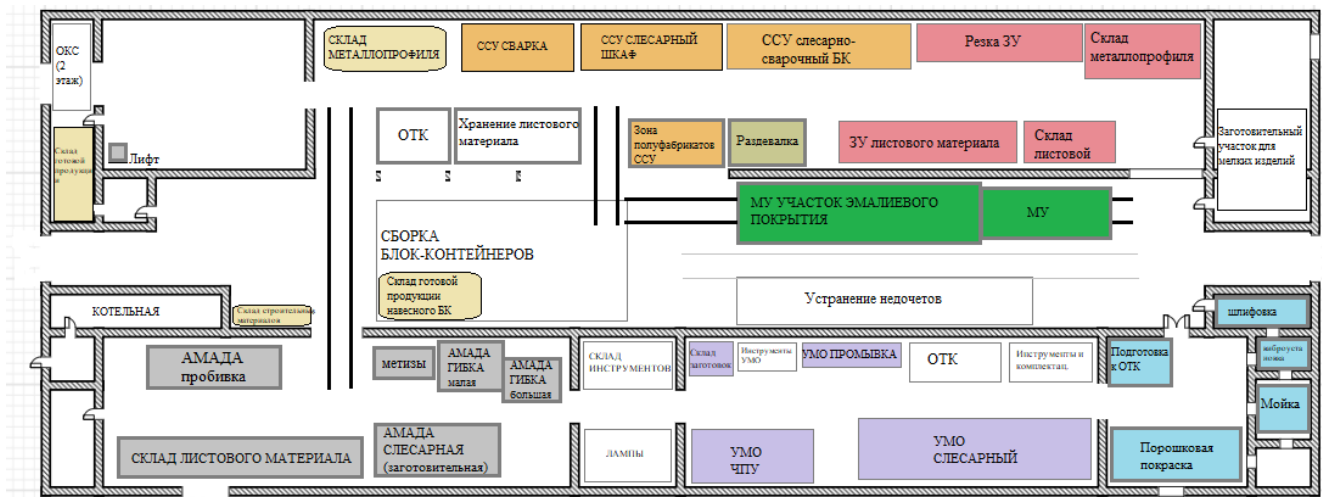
Workshop plan of LLC EDLF “ELESY”.
